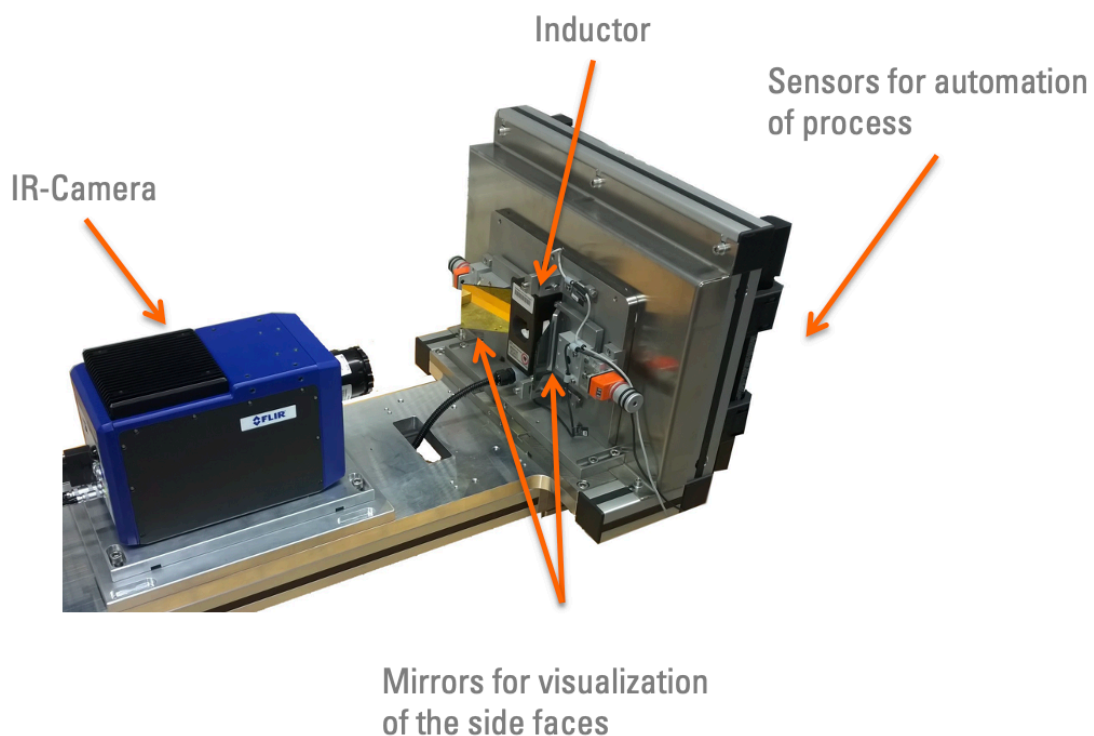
Images of an open inspection head for crack testing on forged components.
